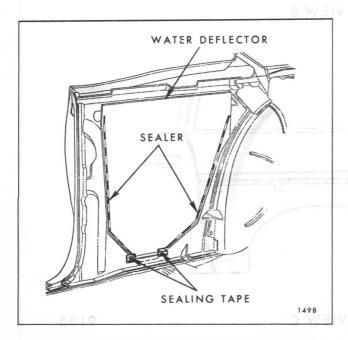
Rear Quarter Inner Panel Sealing - Typical Water
